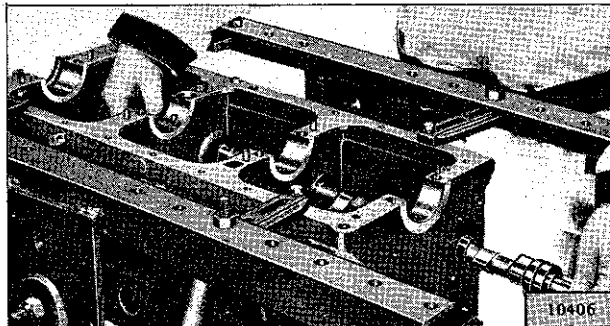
REMOVING CAMSHAFT FROM CYLINDER BLOCK
